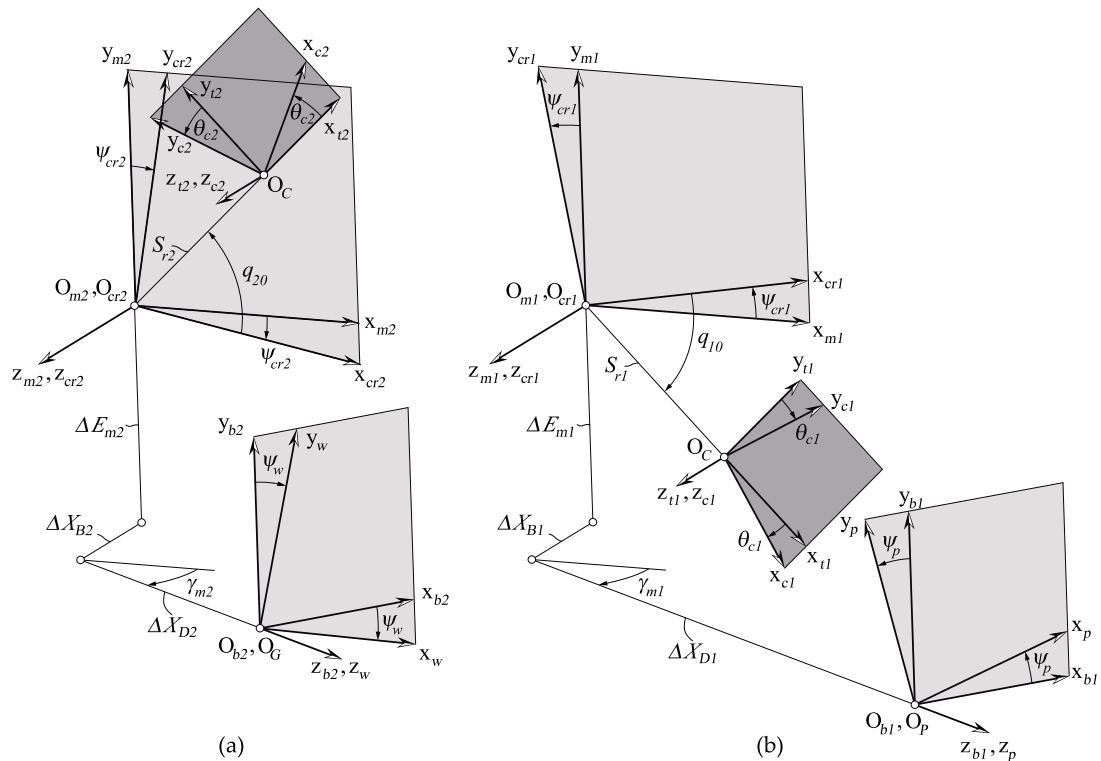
Illustration of basic machine-tool settings for: (a) a right hand wheel and (b) a left hand pinion.
